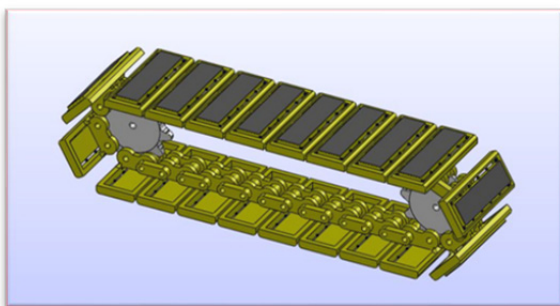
Complete MGV tread assembly with plates (yellow) and adhesive (grey).
